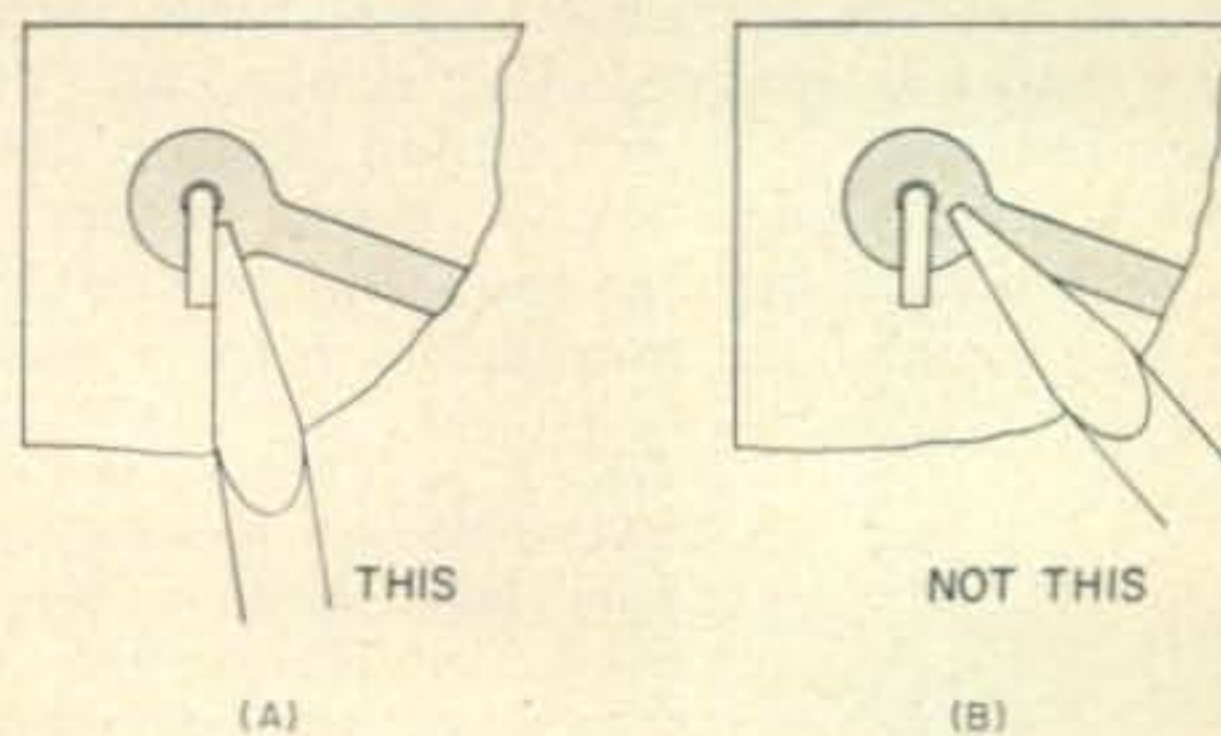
When printed-circuit connections are soldered, the tip of the iron should be placed against both the component lead and the foil as shown at (A), not to just the foil as shown at (B).
